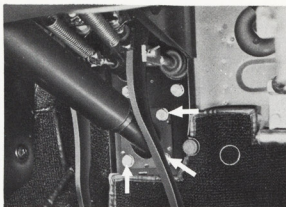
Steering Column Tube Attaching Bolts V1299
